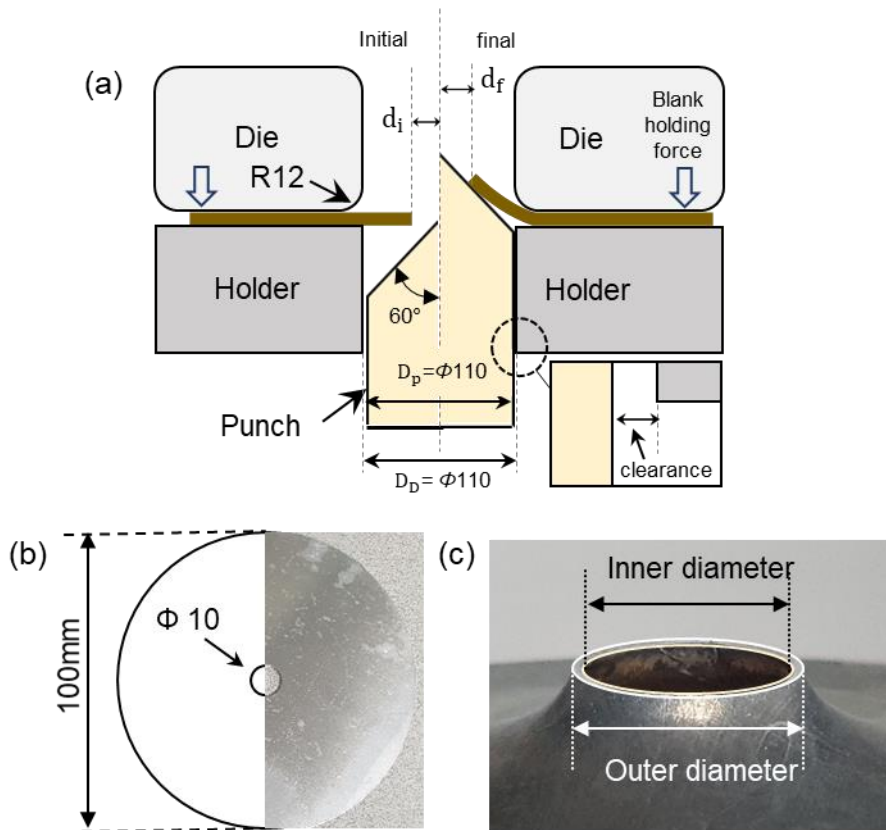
Schematic diagram of conical HE experiment: (a) tool geometry, (b) specimen, and (c) measurement of hole diameter
